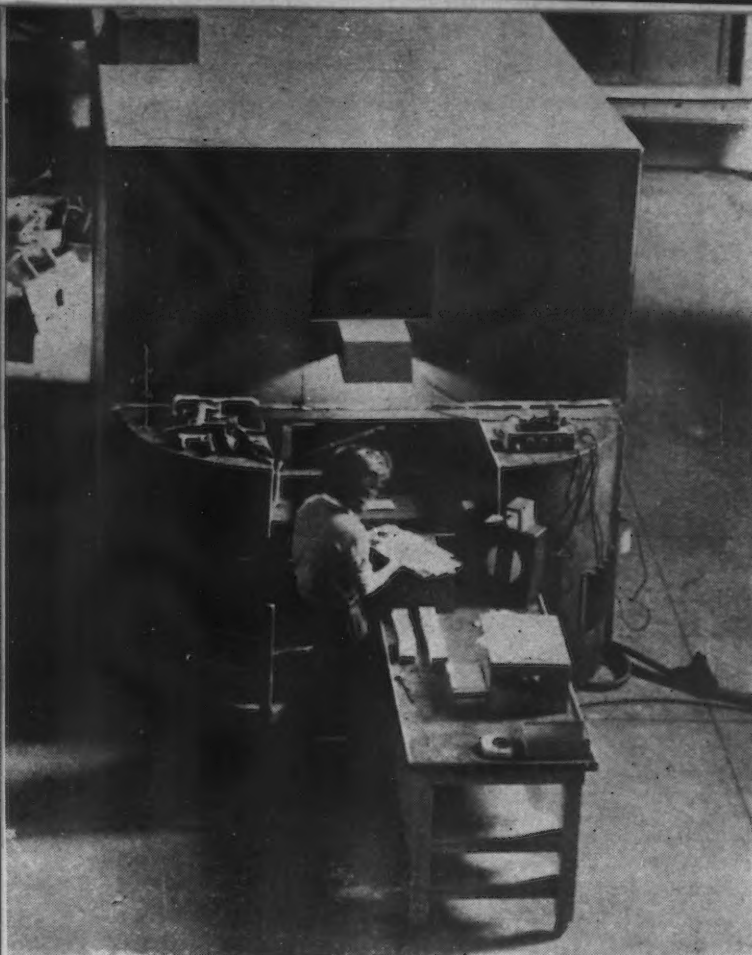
Portable fluoroscopic unit. Exterior view showing loading position and inspection room.
